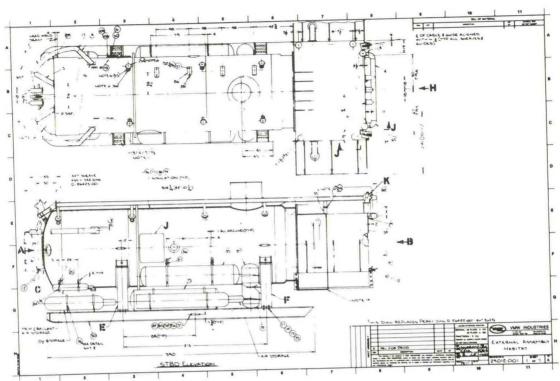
External top assembly drawing showing plan and elevation views of BOND habitat
